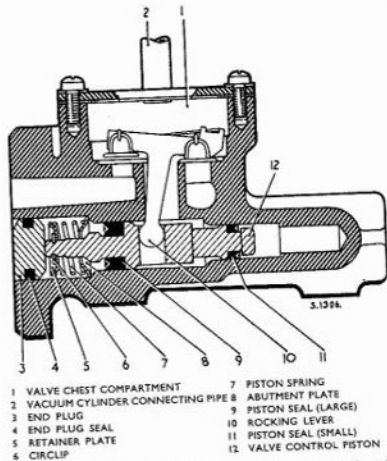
Sectional view of the valve control piston assembly and associated components
